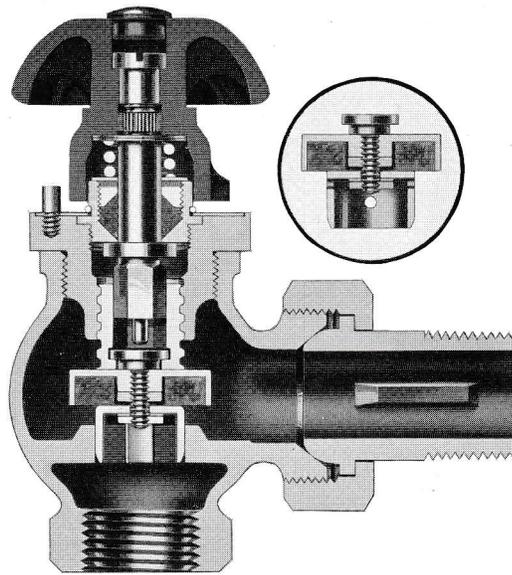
A cutaway view of the Webster "Three-Point" Valve. The Orifice Sleeve usually inserted in the valve after installation is shown within the circle at the right. A temporary sleeve, giving unrestricted steam flow, is shown assembled in the valve.
